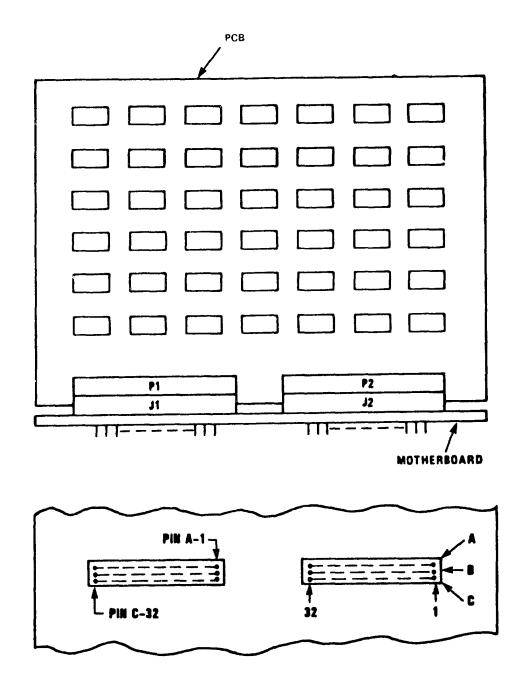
Motherboard connector Pin Layout, 96-Pin
